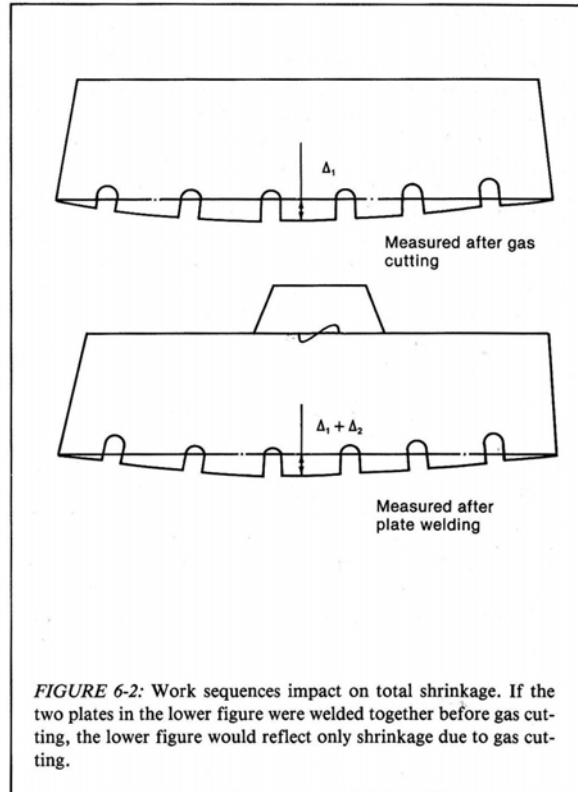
Work sequences impact on total shrinkage. If the two plates in the lower figure were welded together before gas cutting, the lower figure would reflect only shrinkage due to gas cutting.
